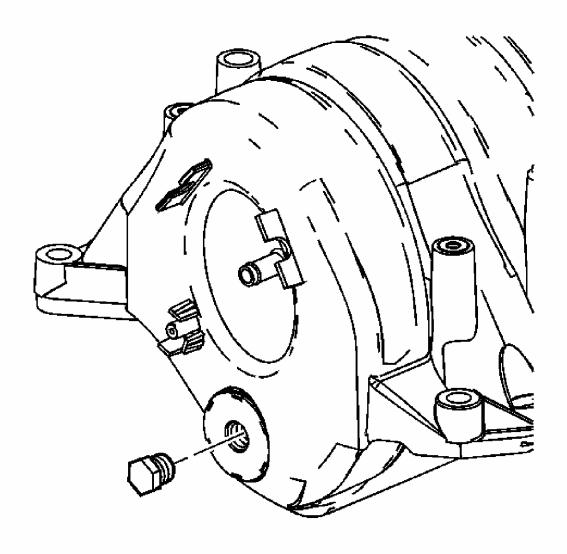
Identifying Intake Manifold Plug Courtesy of GENERAL MOTORS CORP.
